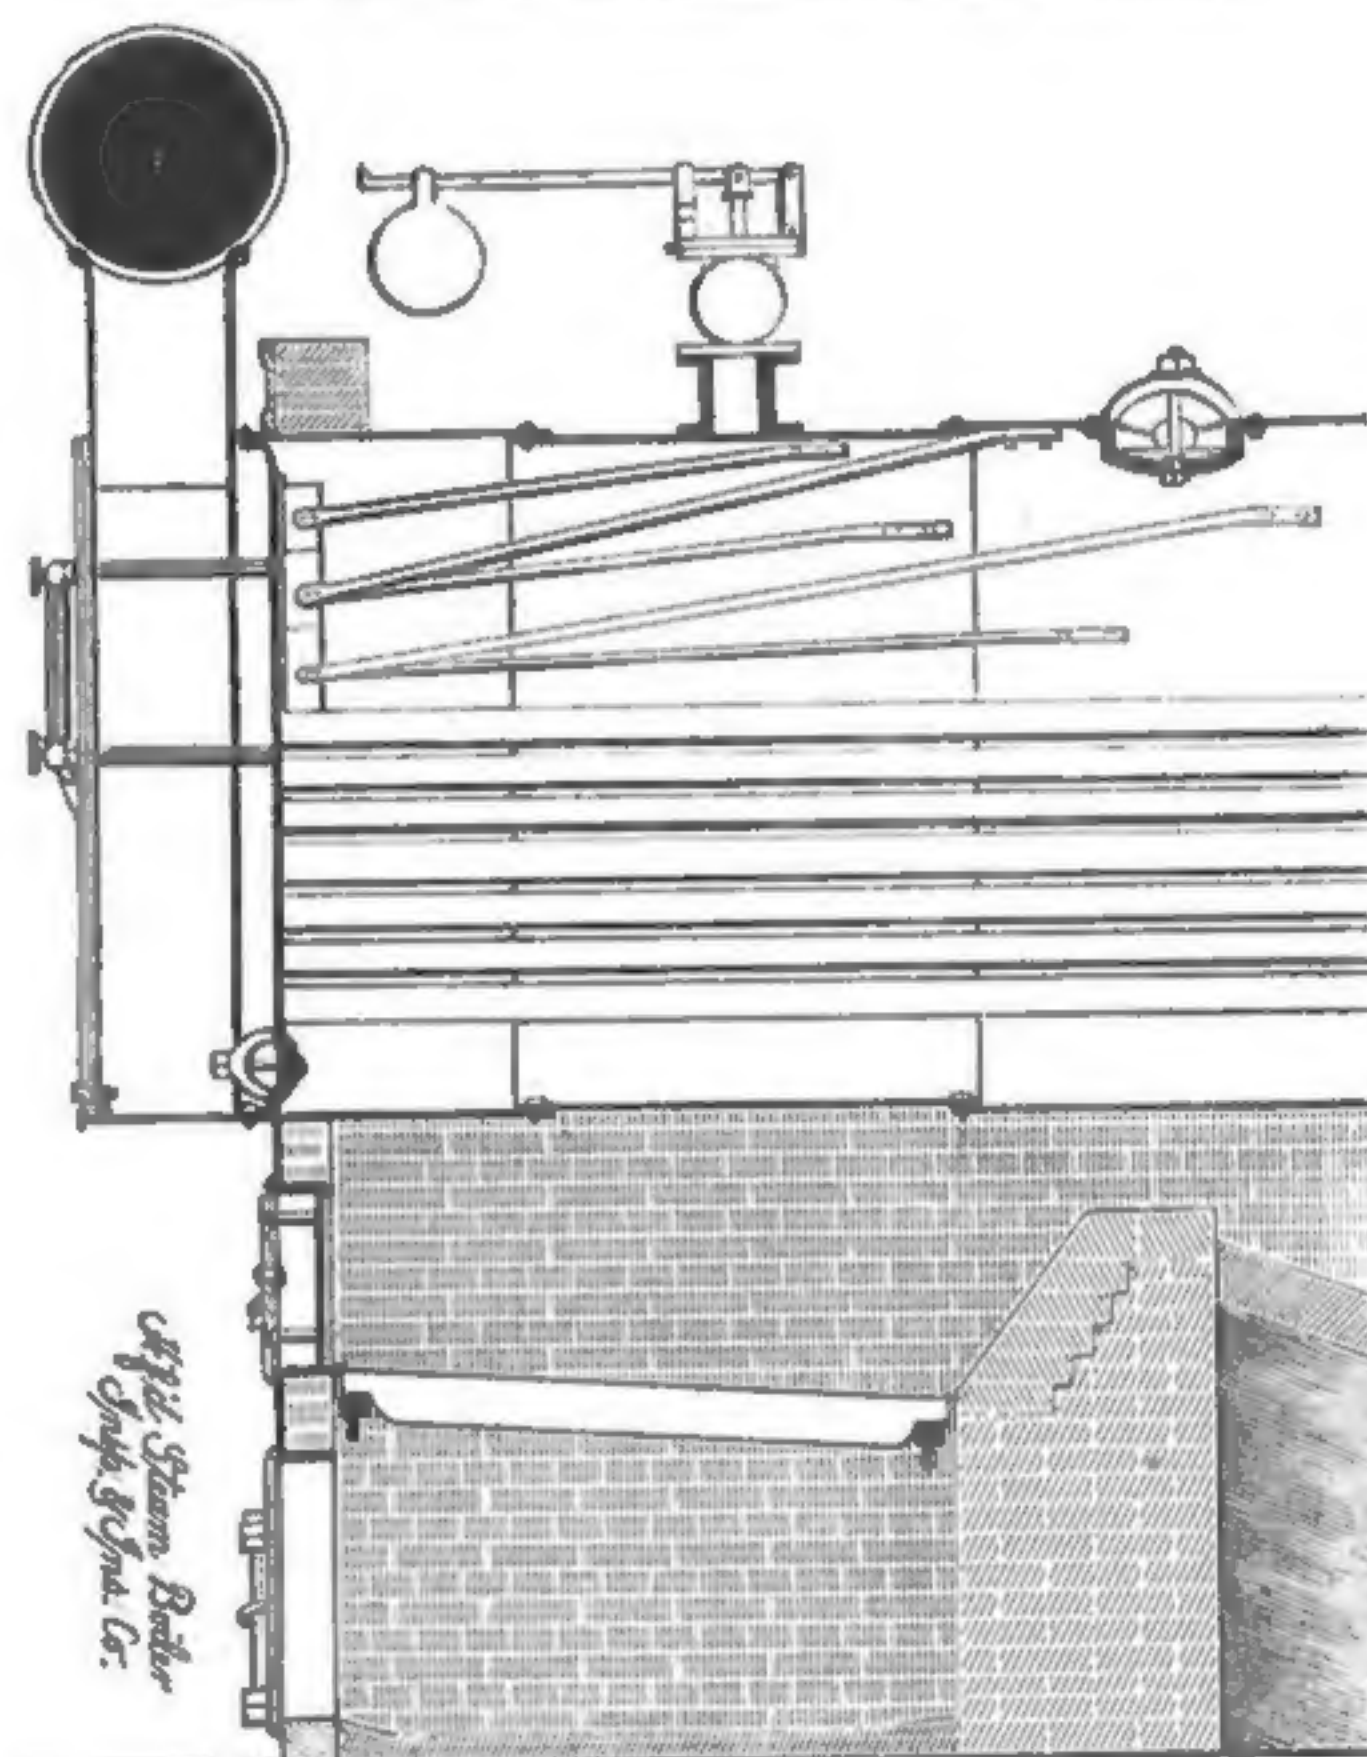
SECTIONAL VIEW OF OVERHANGING FRONT.
